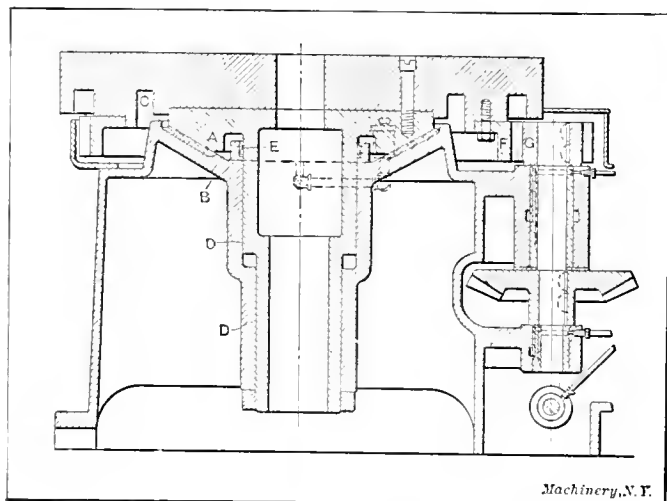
Construction of the Taper Spindle Bearing and Provision for Oiling
